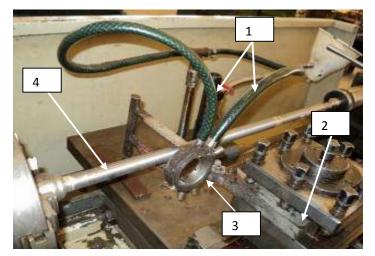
Experimental set up 1 – CF hoses, 2 – Cutting Tool, 3 – Two-way CF feeding device, 4 – Workpiece
